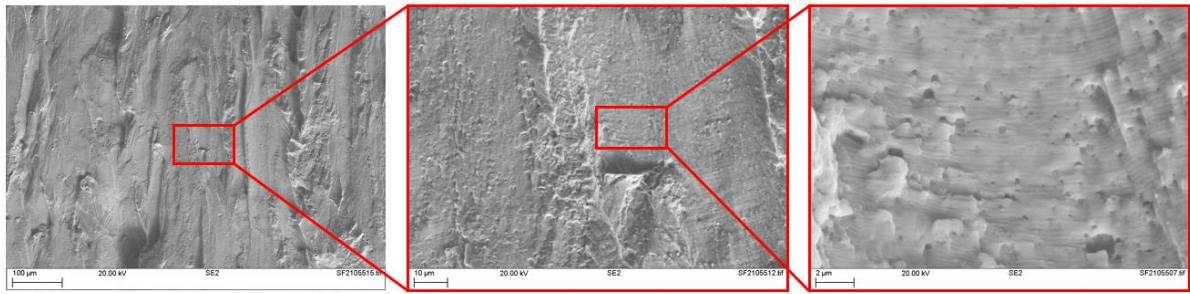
SEM view of specimen N°2 fracture surface, magnified within IN718 bottom layer
